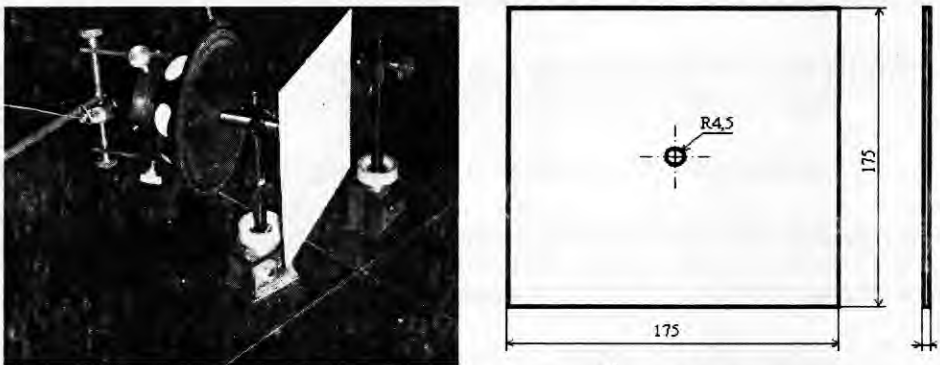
Fixation and geometric dimensions of investigated laminate plates.
